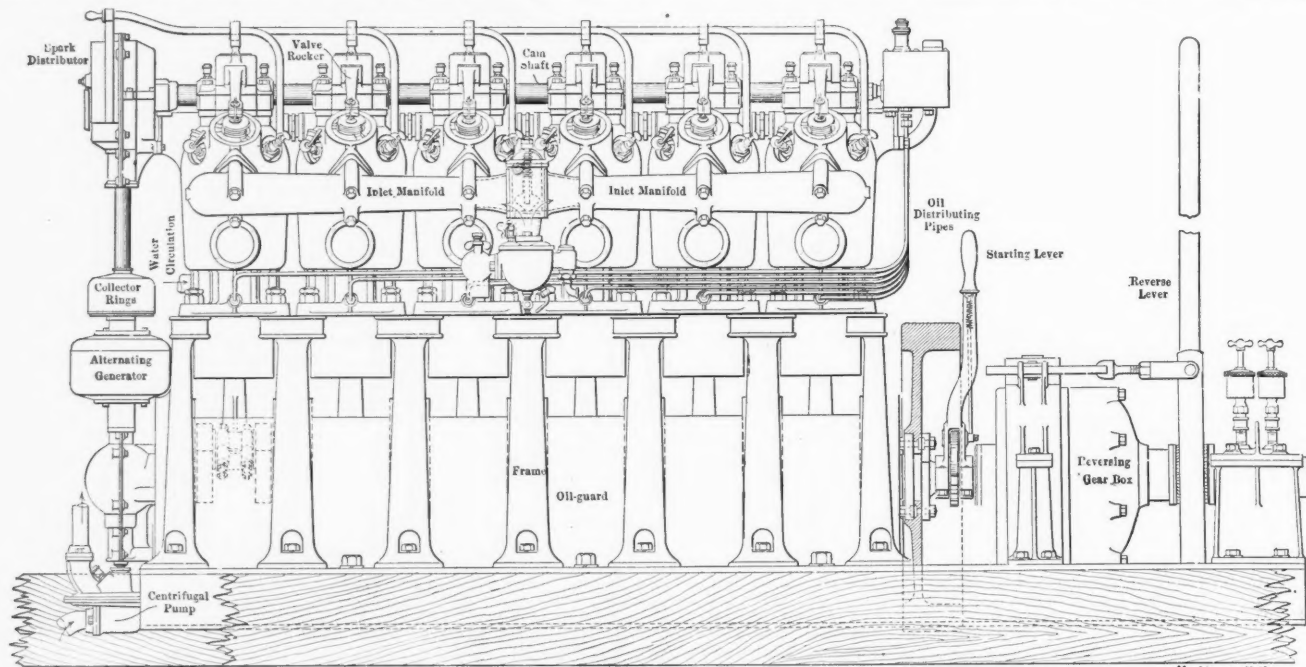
Side Elevation Hurd & Haggin Six-cylinder Engine, showing the Inlet Manifold.
